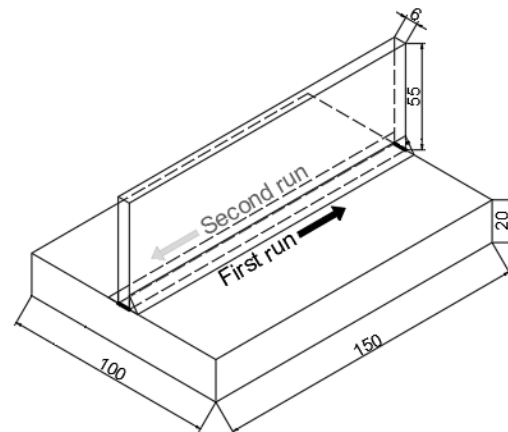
Specimen dimensions [mm] and welding procedure
